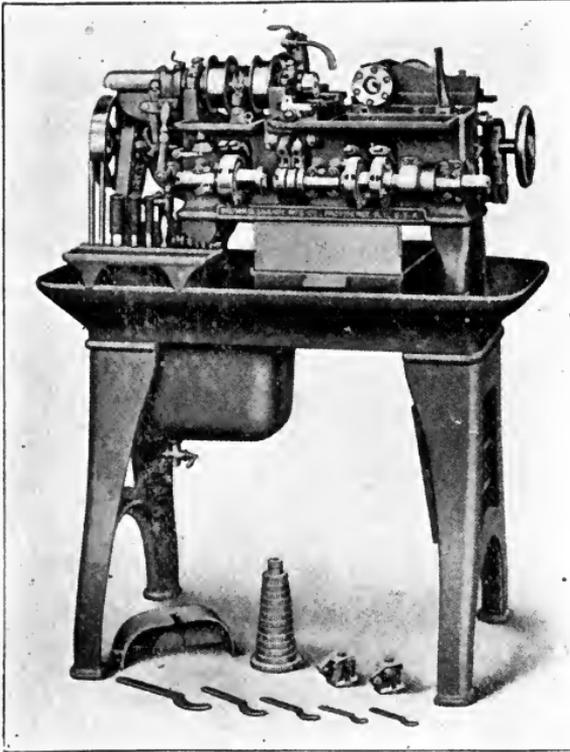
Brown and Sharpe Automatic Screw Machine,
